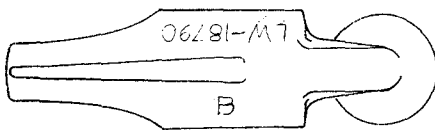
P/N LW-18790 Rocker Arm Assembly Showing Oil Drip Hole and Area of Cracking
